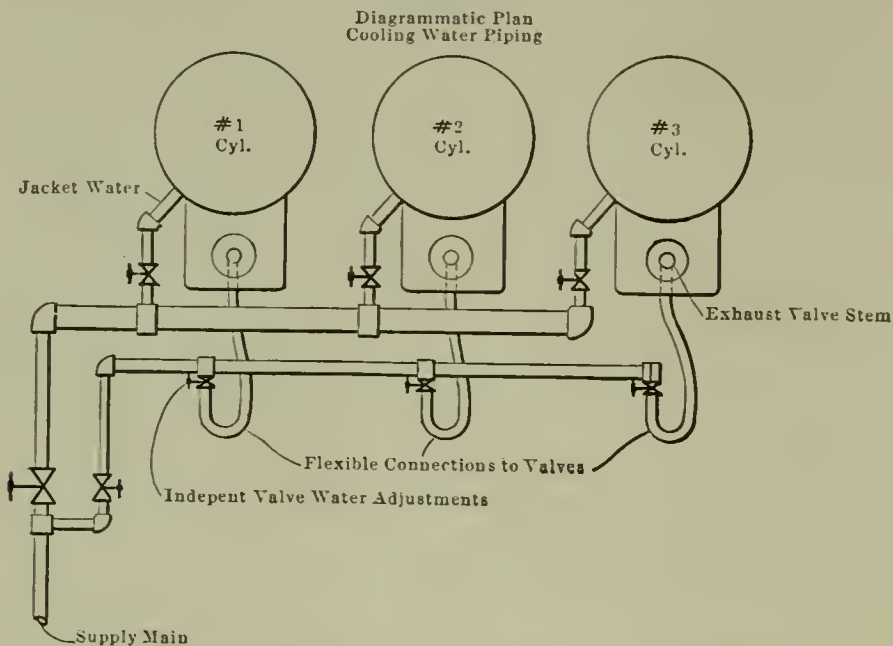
PLAN OF COOLING WATER PIPING FOR CYLINDERS AND EXHAUST VALVES
